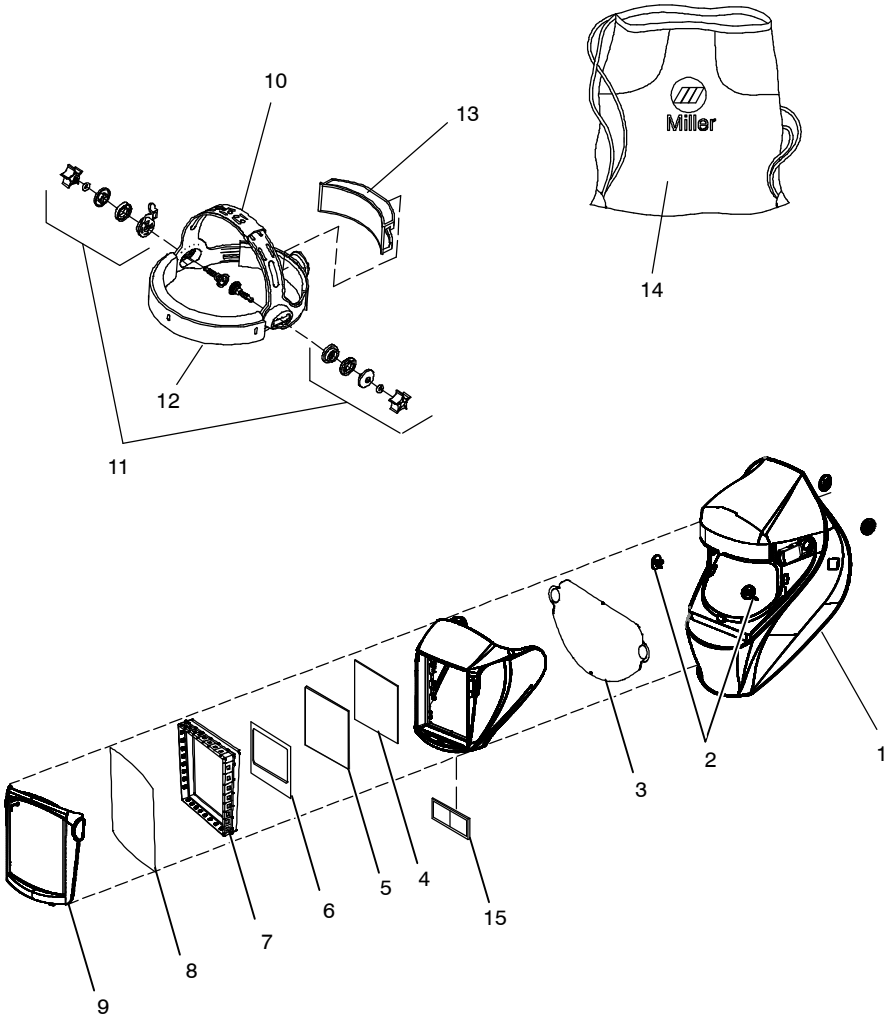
Titanium 1600i Auto-Darkening Welding Helmet
